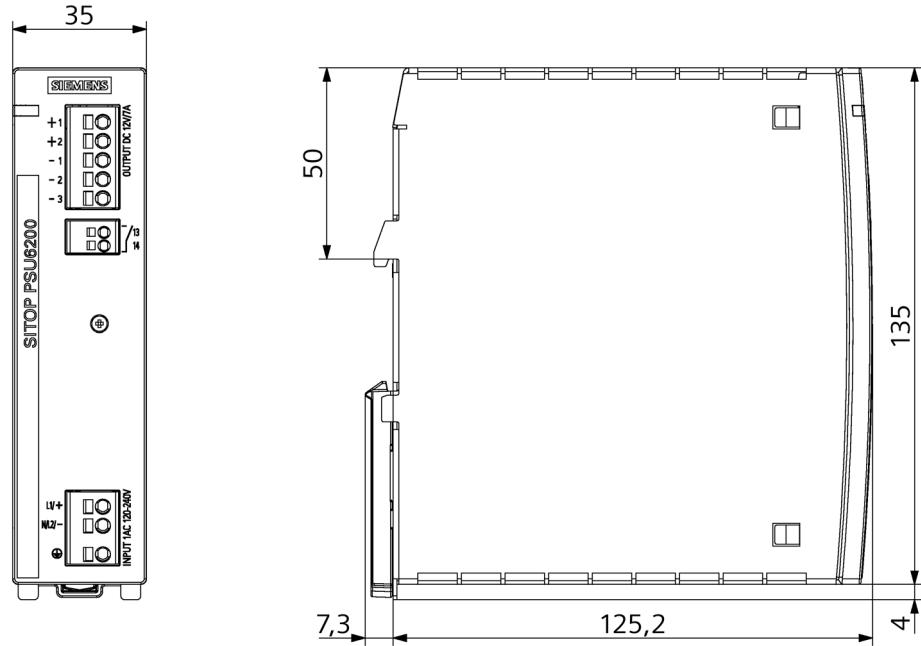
Dimension drawing 6EP3323-7SB00-0AX0, 6EP3333-7LB00-0AX0, 6EP3333-7SB00-0AX0 and 6EP3333-7SC00-0AX0
